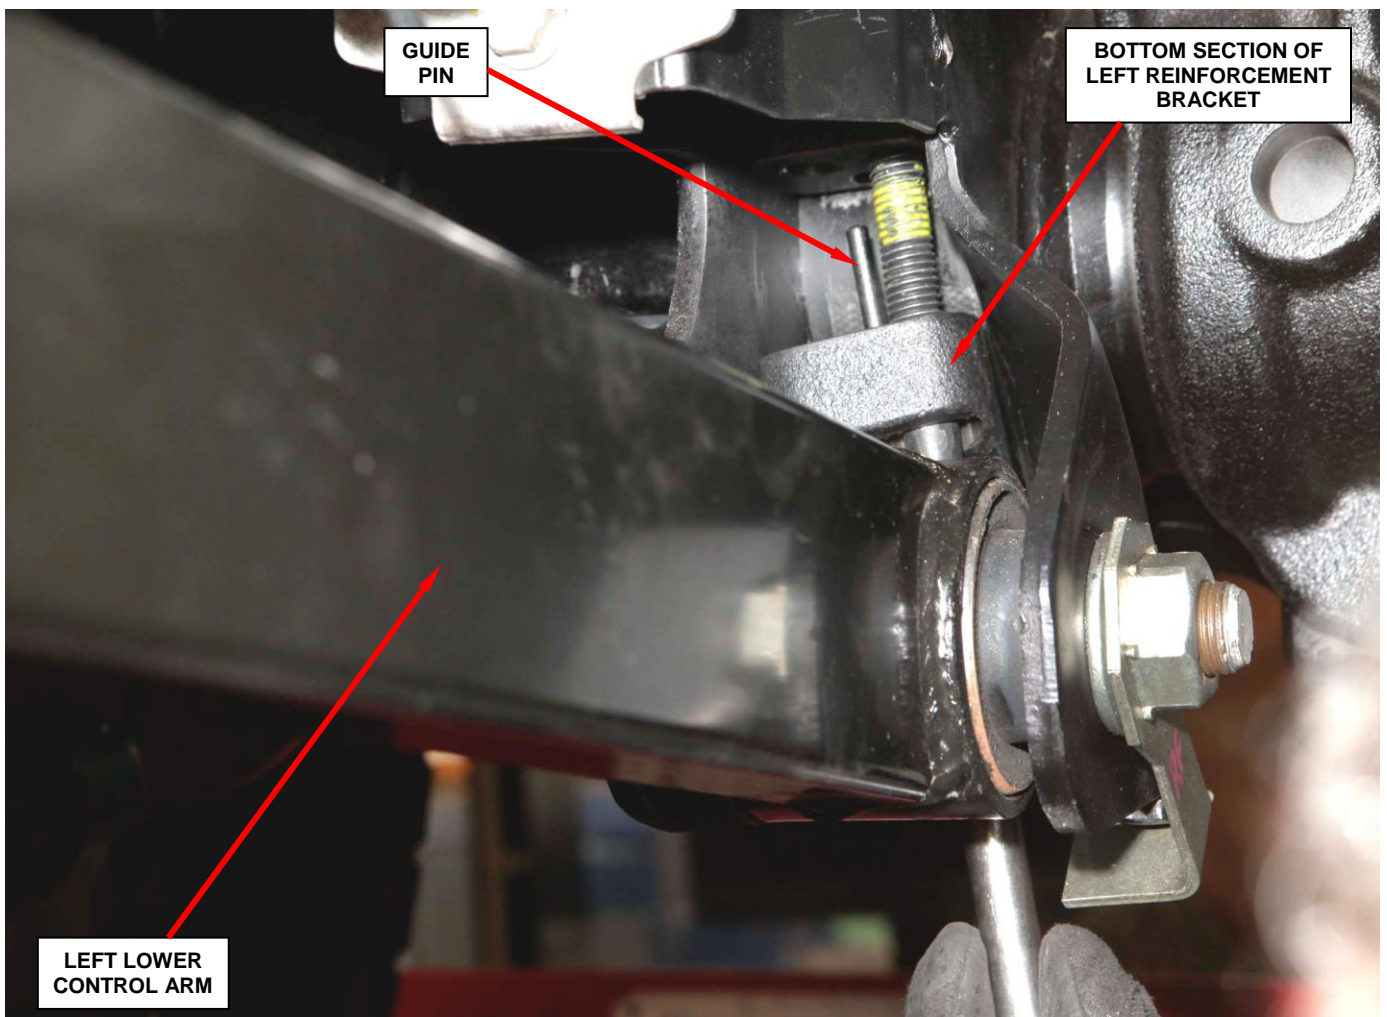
Install Left Side Bottom Reinforcement Bracket Retaining Bolts
